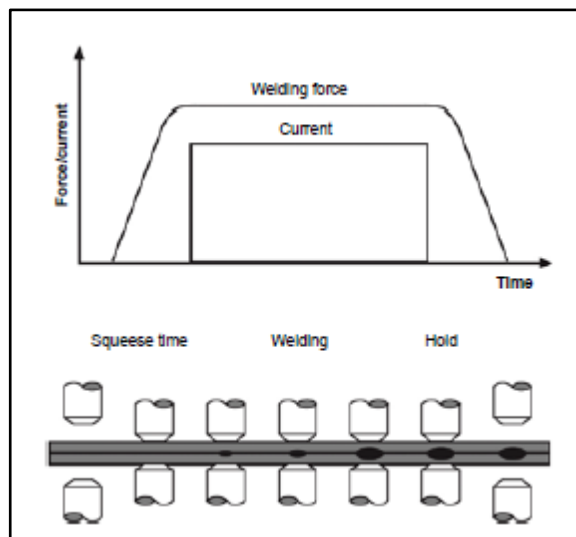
The Principle Stages of Resistance Spot Welding
